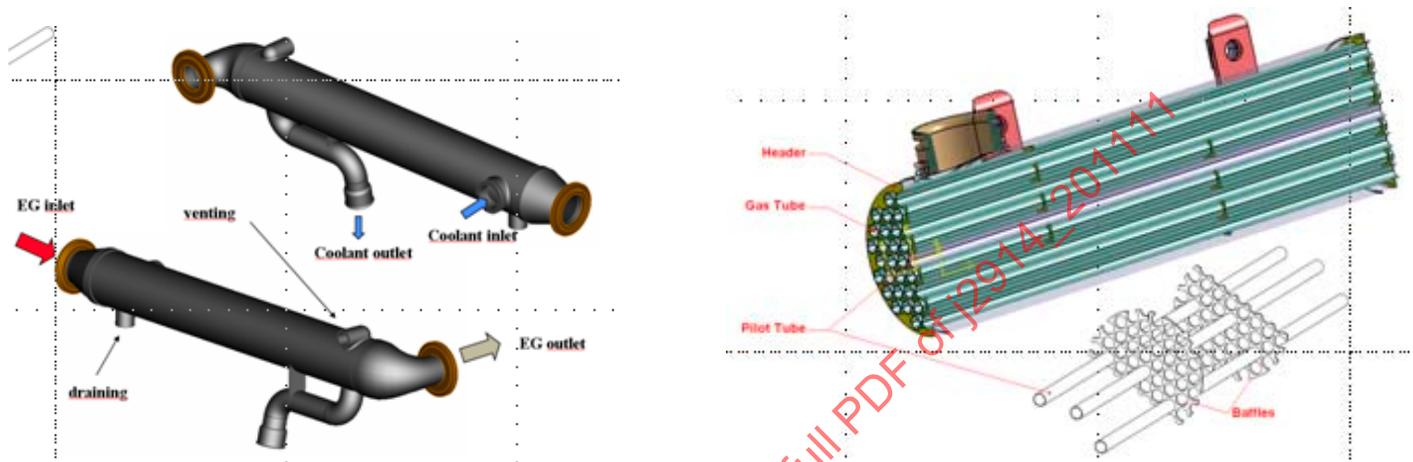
ROUND TUBE WITH COOLANT SIDE BAFFLE DESIGN
